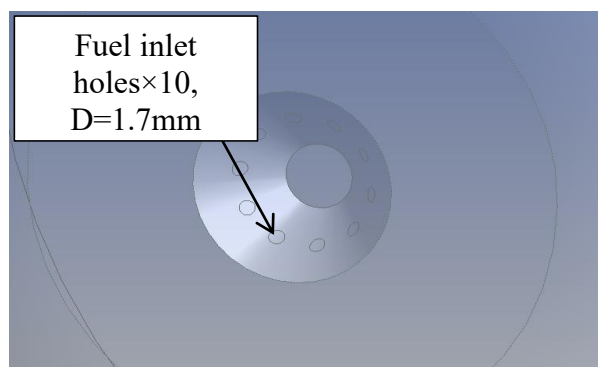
reverse air combustor-fuel inlet dimensions.
